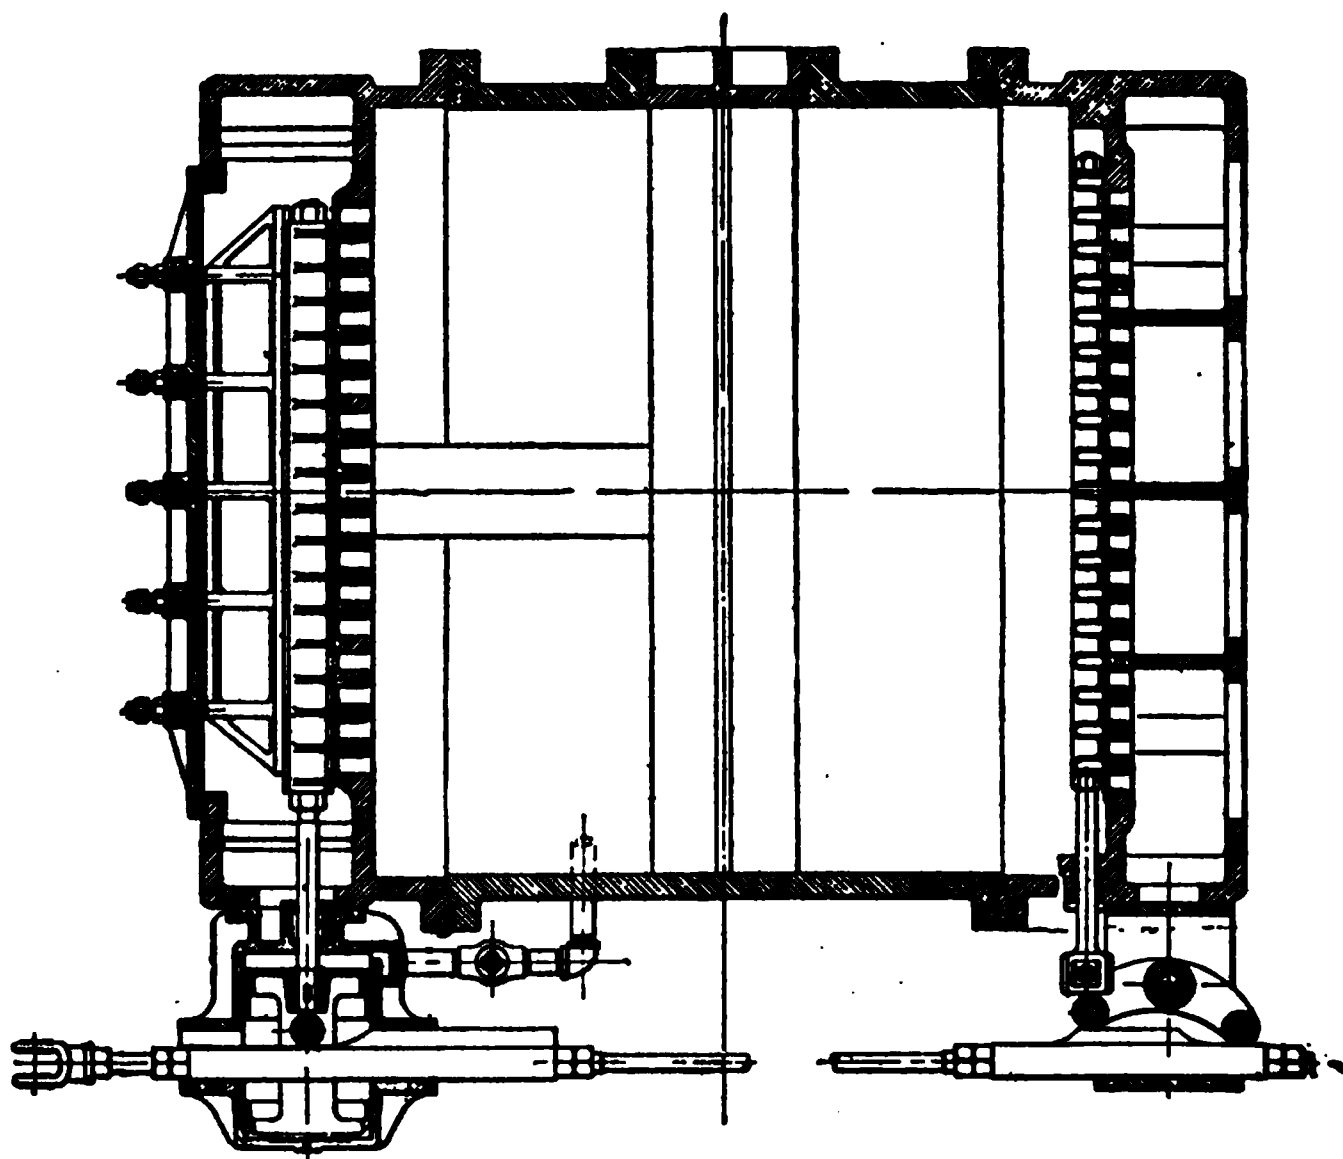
,353.—Southwark air cylinder head, inside view, showing inlet valve on the inside and seat of outlet valve above.
